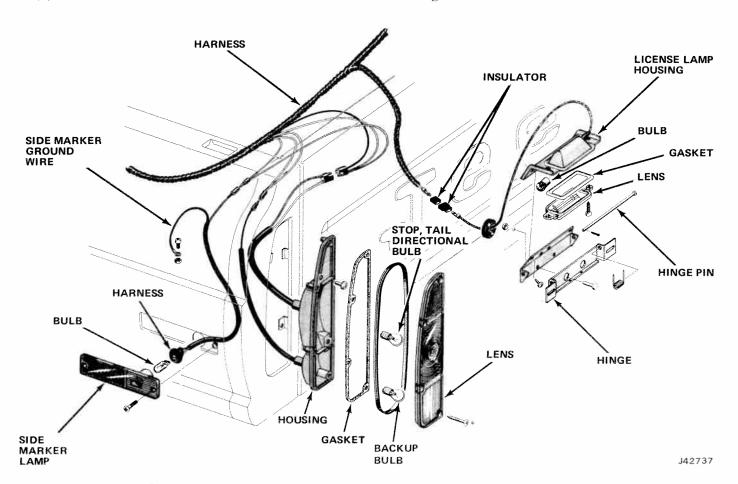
Rear Directional, Stop, Backup, Taillight and Side Marker - Truck
